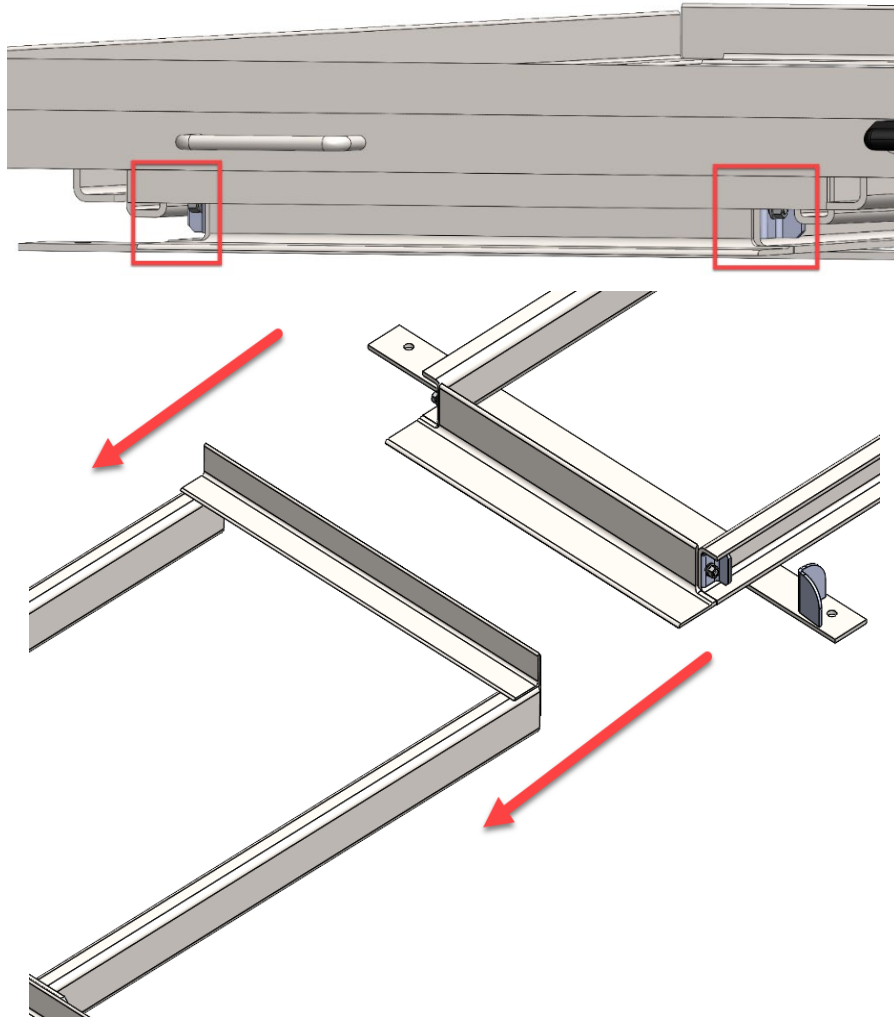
Ford EBL Transfer and Cargo Frame Removal.
